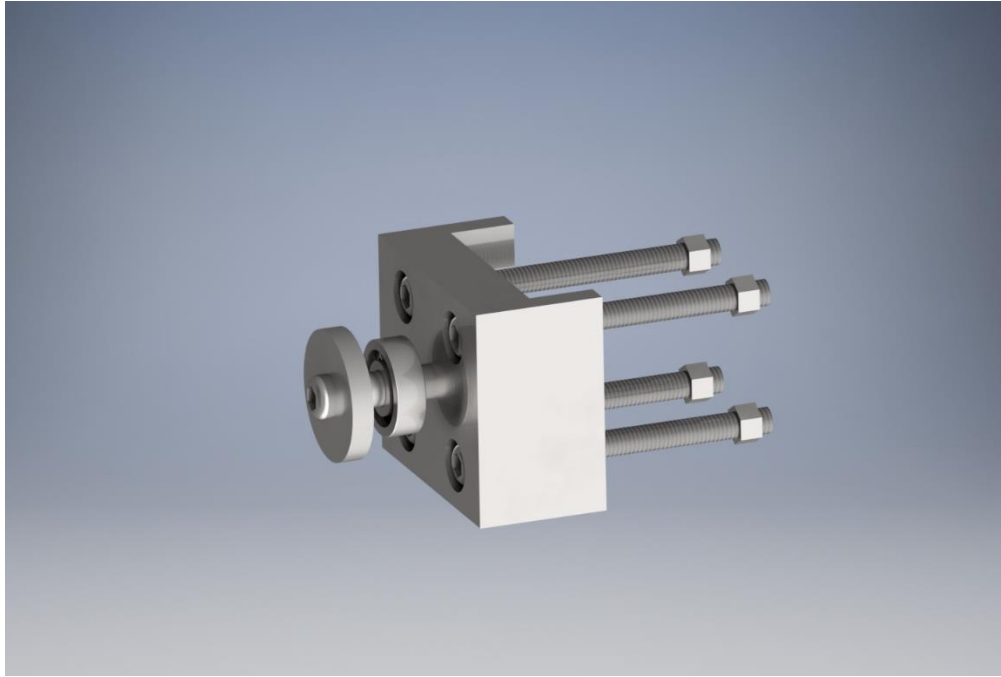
CAD model of the custom pulley without pulley wheel and where bearing and screws are visible.
